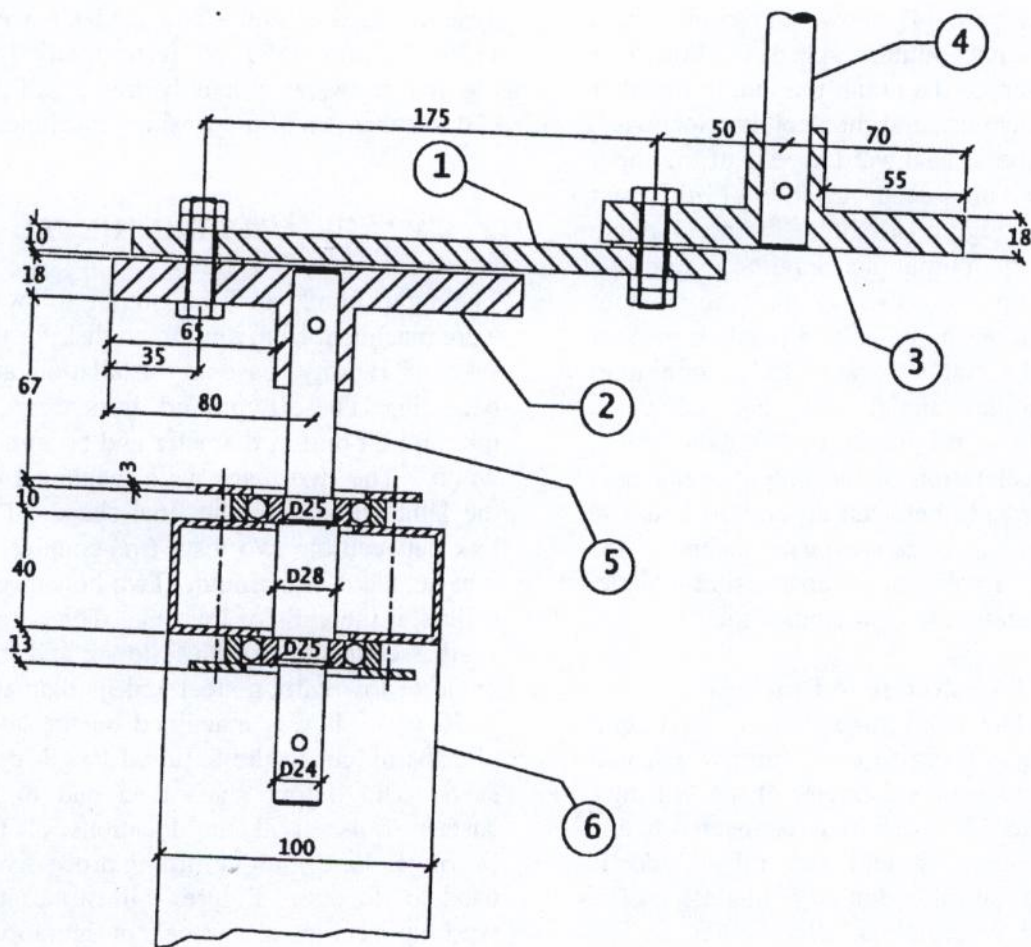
Assembly drawing of the Four-Bar Linkage in the washing machine.
